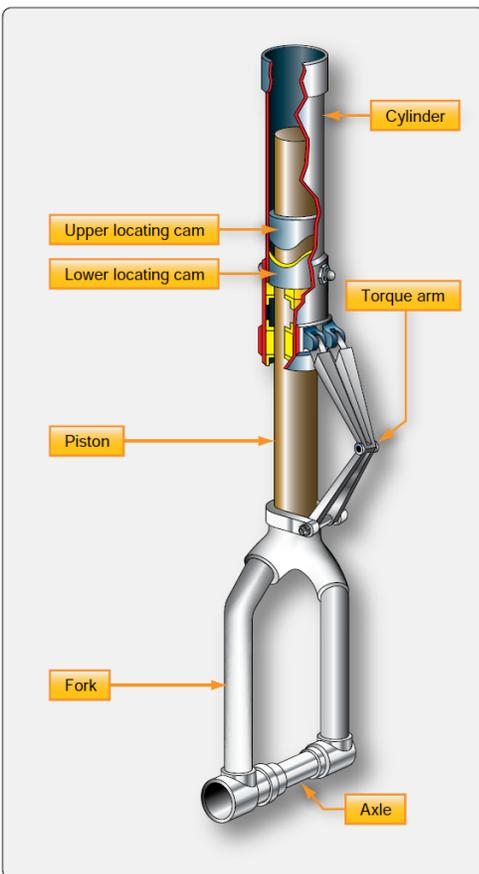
An upper locating cam mates into a lower cam recess when the nose landing gear shock strut is extended before landing and before the gear is retracted into the wheel well.
